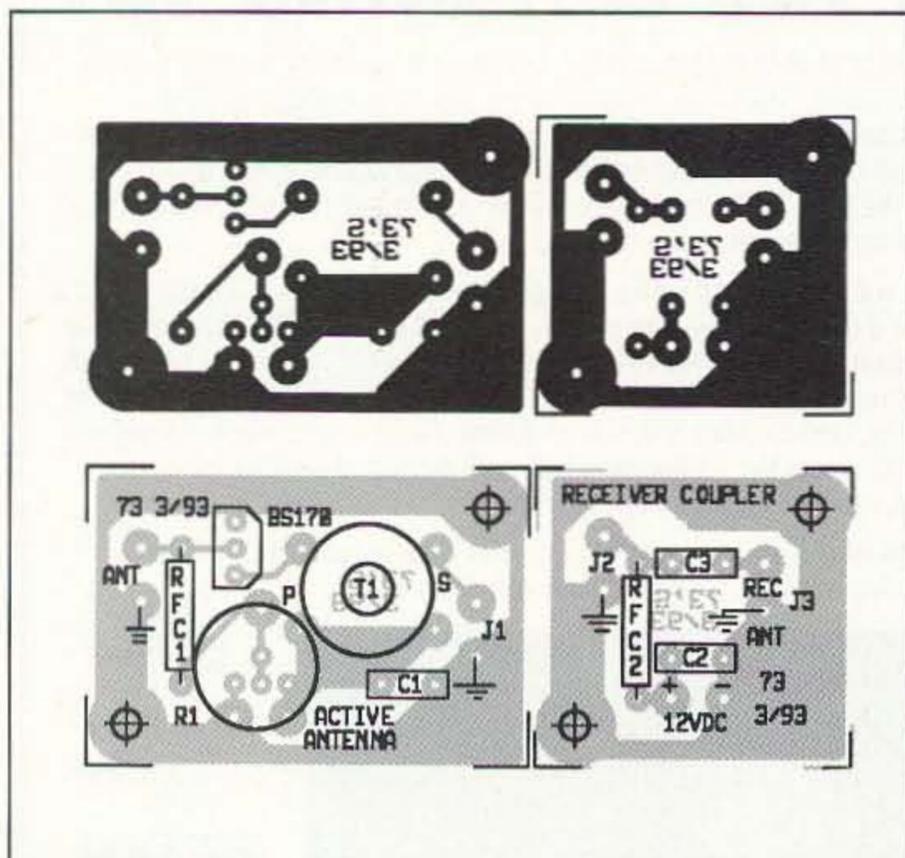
PC board pattern and parts placement for active antenna and receiver coupler.
